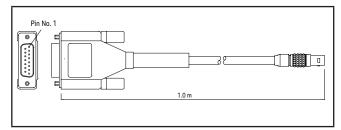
Mechanical dimension for DSUB 15-pin cable (87405C-103)
